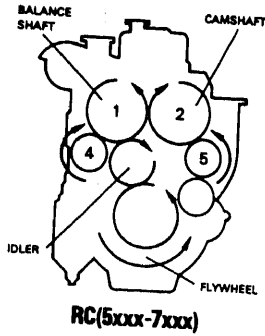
Accessory Drive Locations (In-Line Engines)
